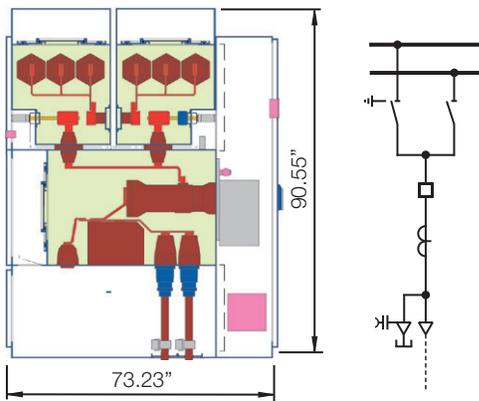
Feeder panel 2500 A with current and voltage transformer and three cables per phase
